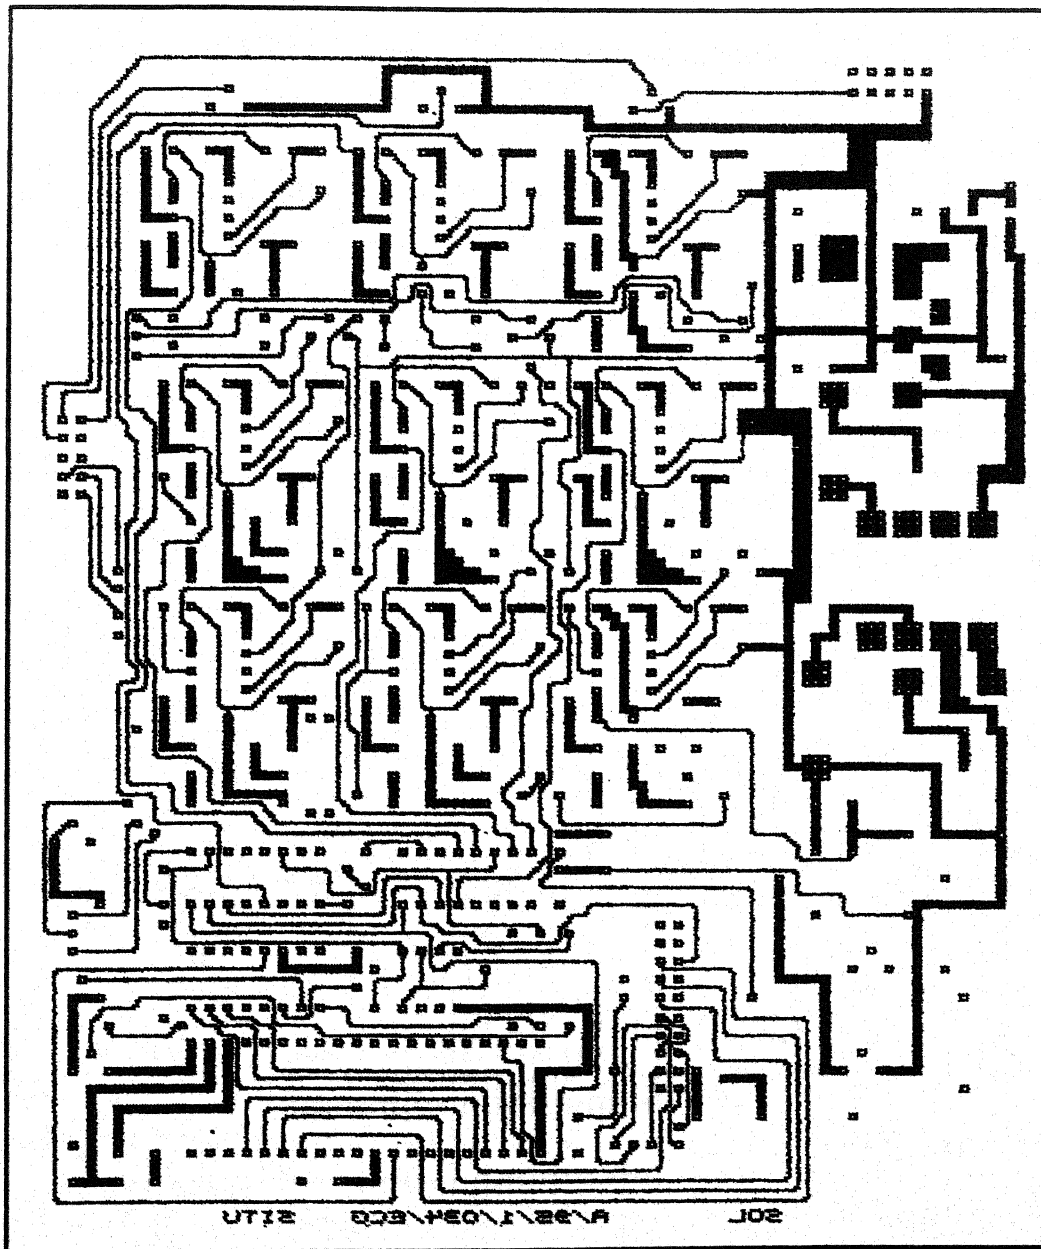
PCB layout solder side of ECG/Arrhythmia simulator using microcontroller
